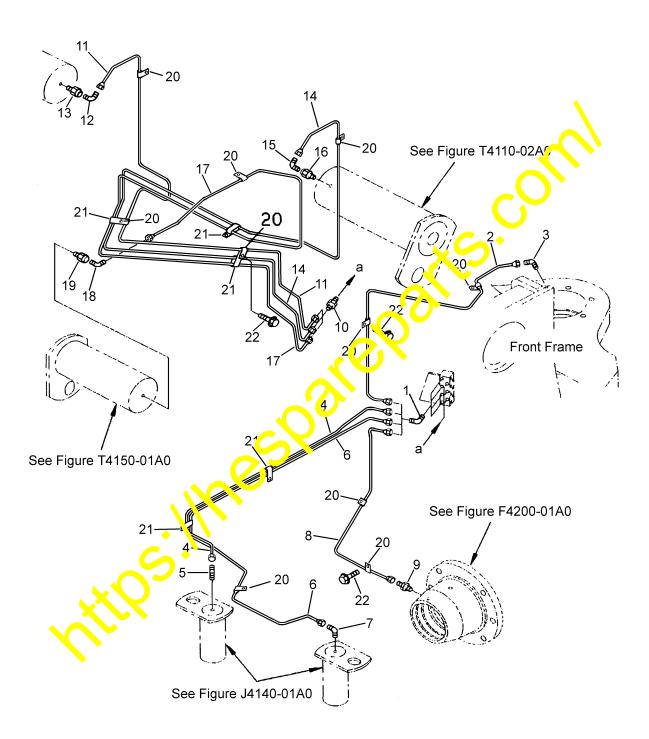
A1 (Grease Piping for Dump and Steering Cylinder Lower Pin)
